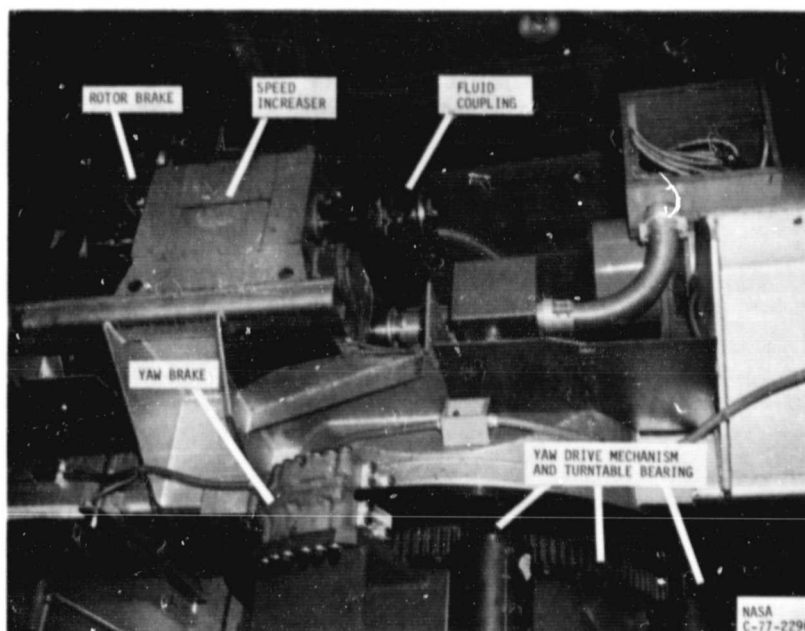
Fluid Coupling, Speed Increaser, Rotor Brake, Yaw Drive Mechanism, Turntable Bearing, and Yaw Brake
